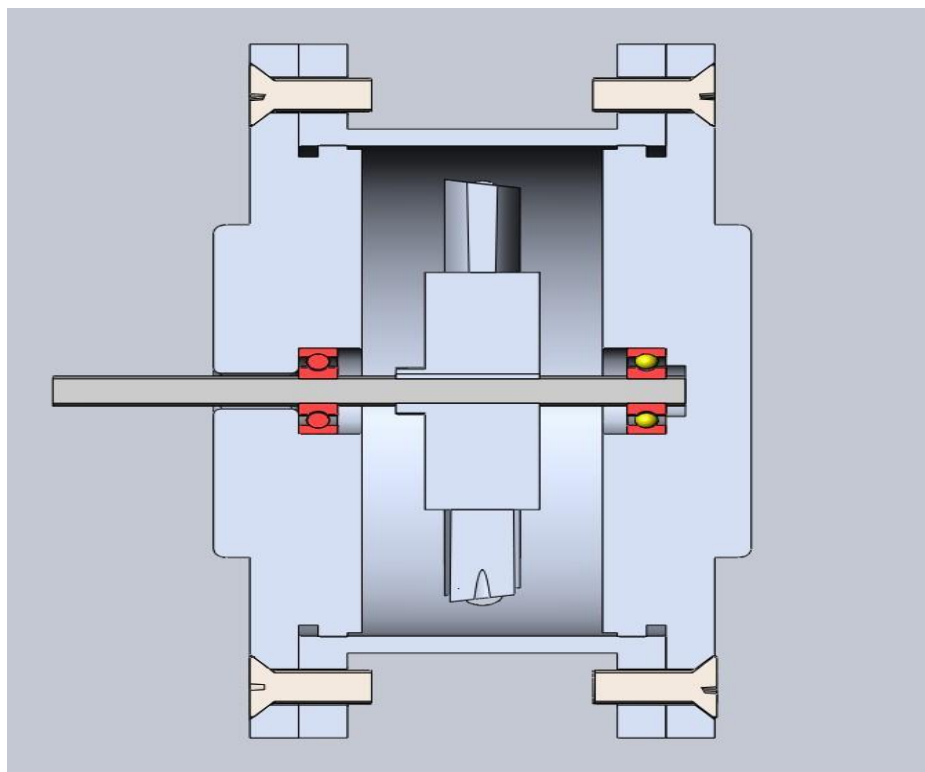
Sectional Side view of Assembled Casing with Turbine inside
